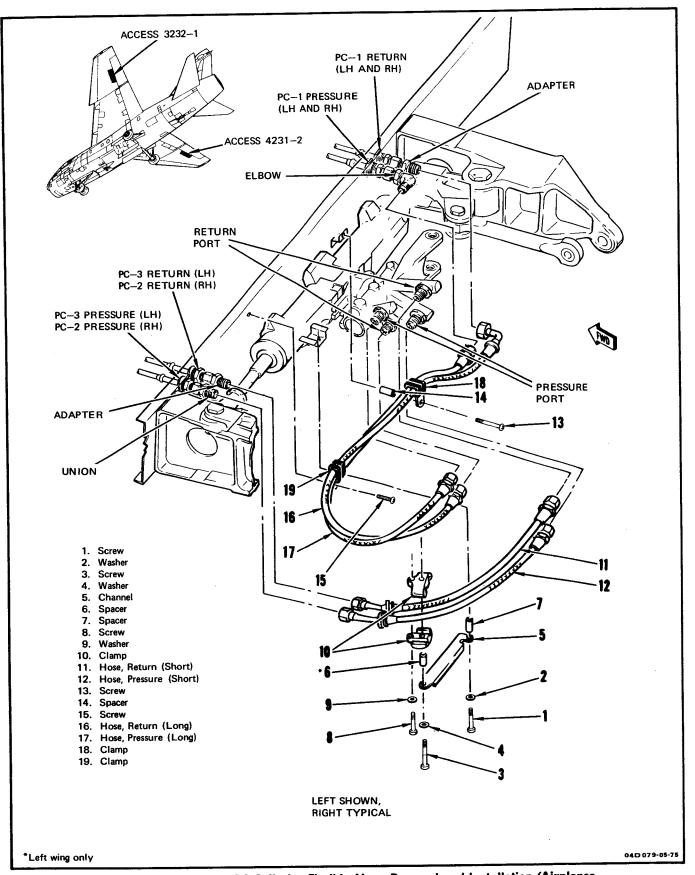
Aileron PC Cylinder Flexible Hose Removal and Installation (Airplanes AF69-6197 and Subsequent After T.O. 1A-7D-756)
